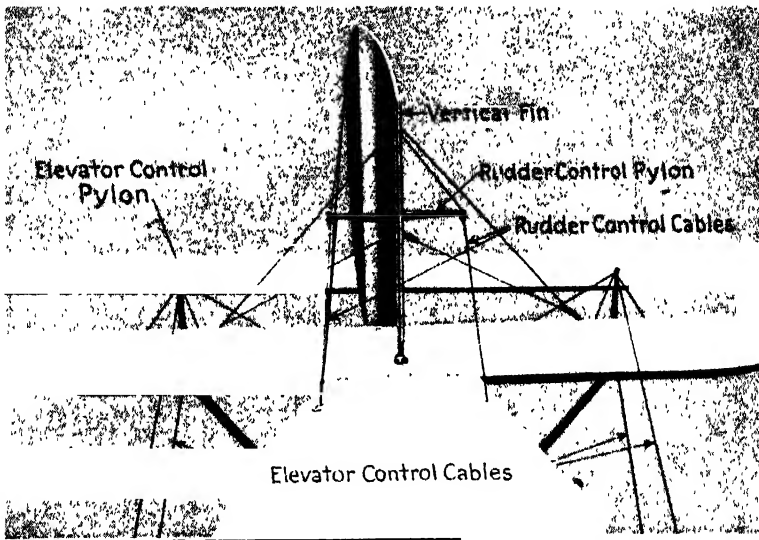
View of Airplane Fuselage Rear with Elevator and Vertical Rudder Control Cables in Place.
